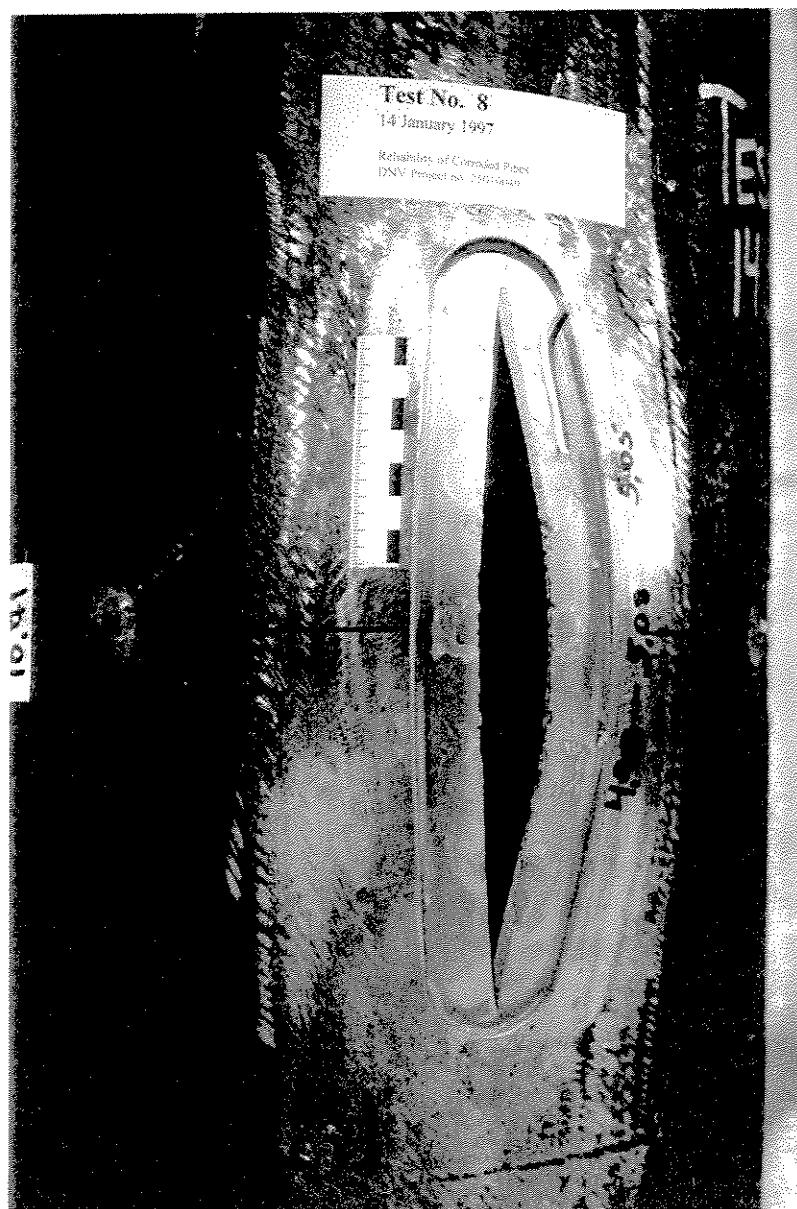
Picture of the test specimen no. 8 after the burst test
